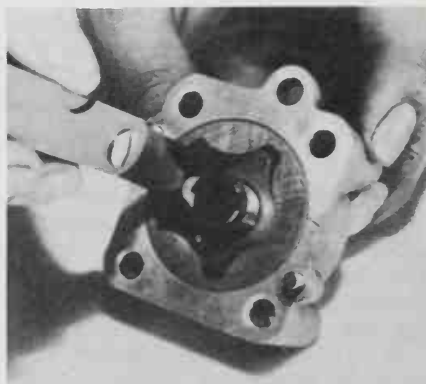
Measure clearance between inner and outer oil pump rotors as shown. Desired clearance is 0.11-0.15 mm.
